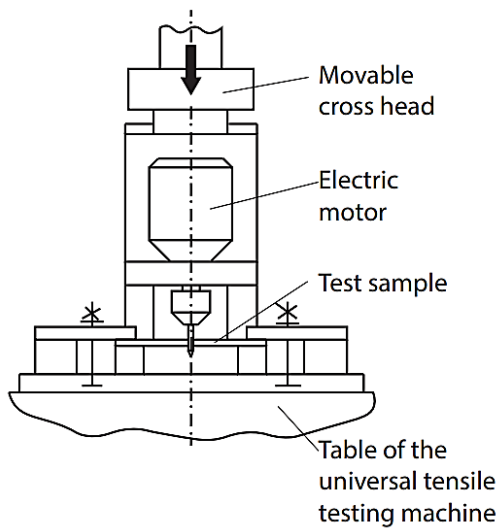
Friction drilling device adaptable on a universal tensile-compression testing machine
